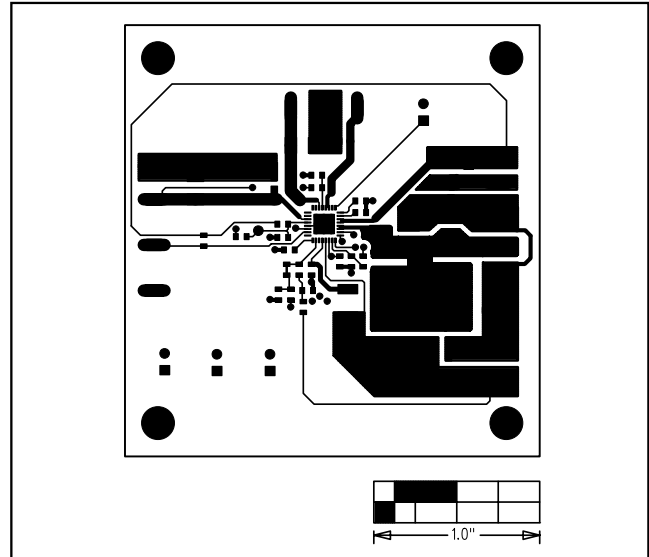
MAX15008 EV Kit PCB Layout—Component Side (Layer 1)
